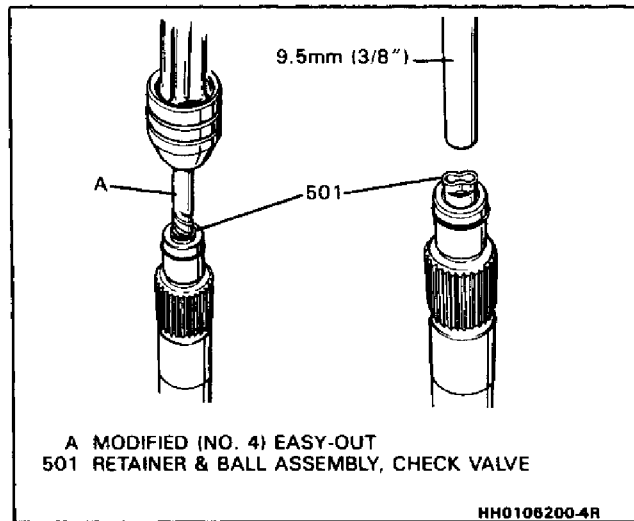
Removing and Installing Check Valve Retainer and Ball Assembly
